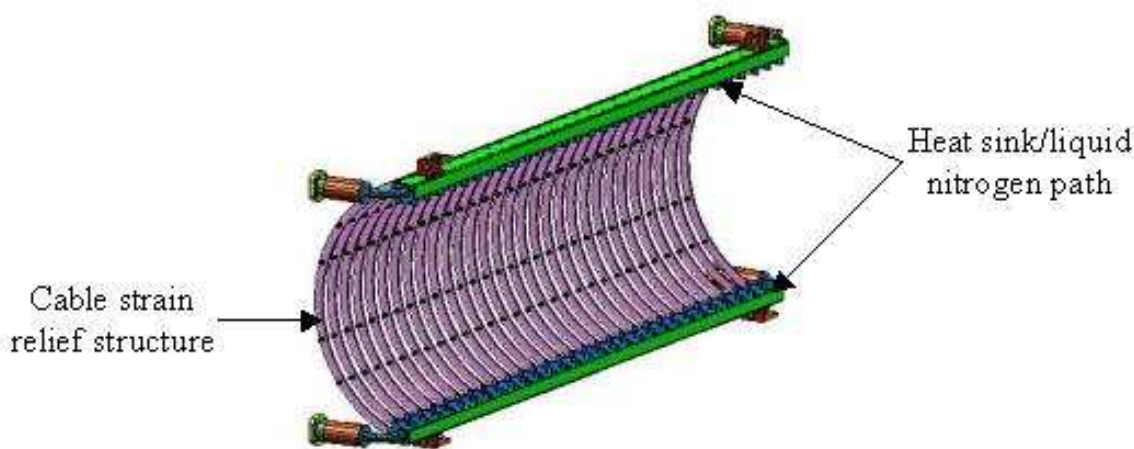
Drawing showing the cold block inside the vacuum vessel.
